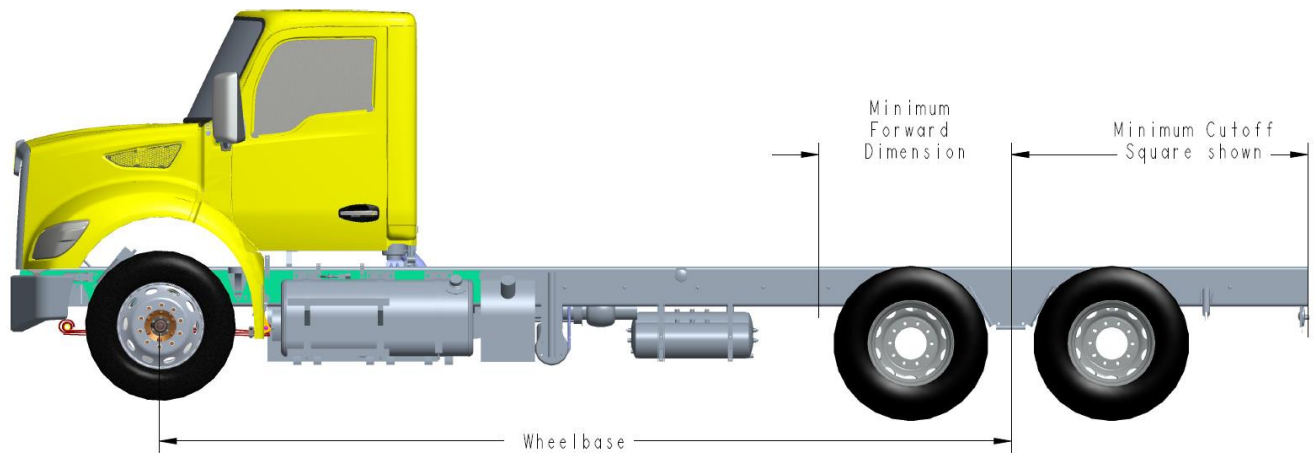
Dimension "B" Labeled as "Minimum Forward Dimension"
